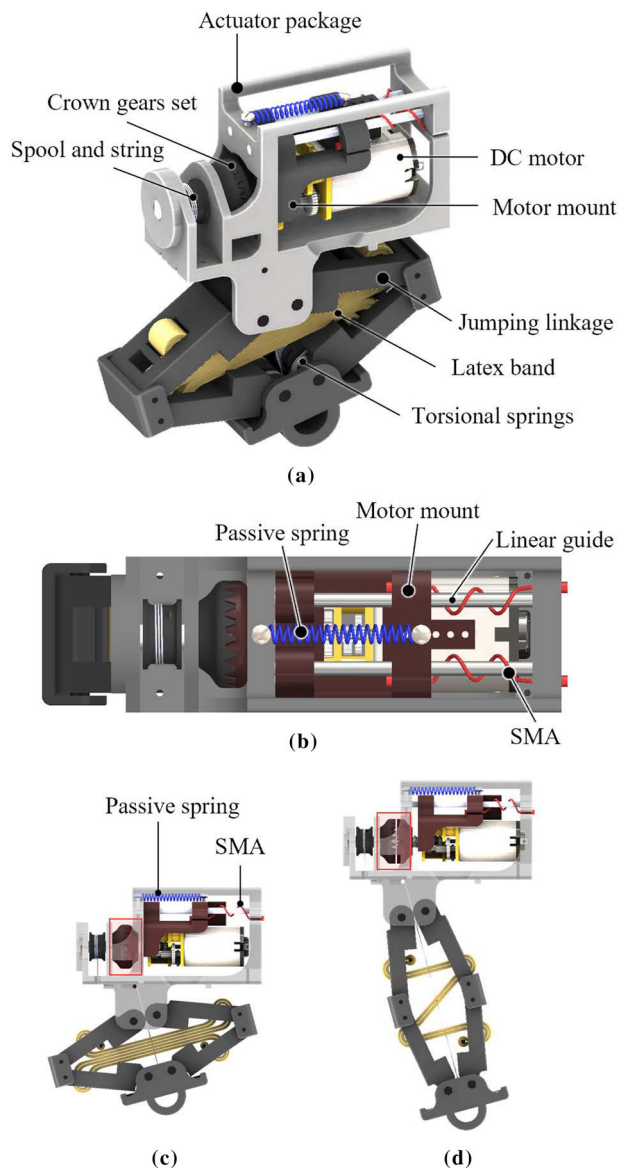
Detailed composition of the jumping mechanism. a Overall components of the jumping mechanism b Top view of the jumping mechanism. The passive spring and SMA generate the movement of the motor mount along the linear guide. The passive spring pulls the motor mount leftward and the SMA pulls rightward. c Energy-loaded state of the jumping mechanism. In this state, the crown gears are engaged. d Energy-released state of the jumping mechanism. To trigger the jumping, the crown gears are disengaged
